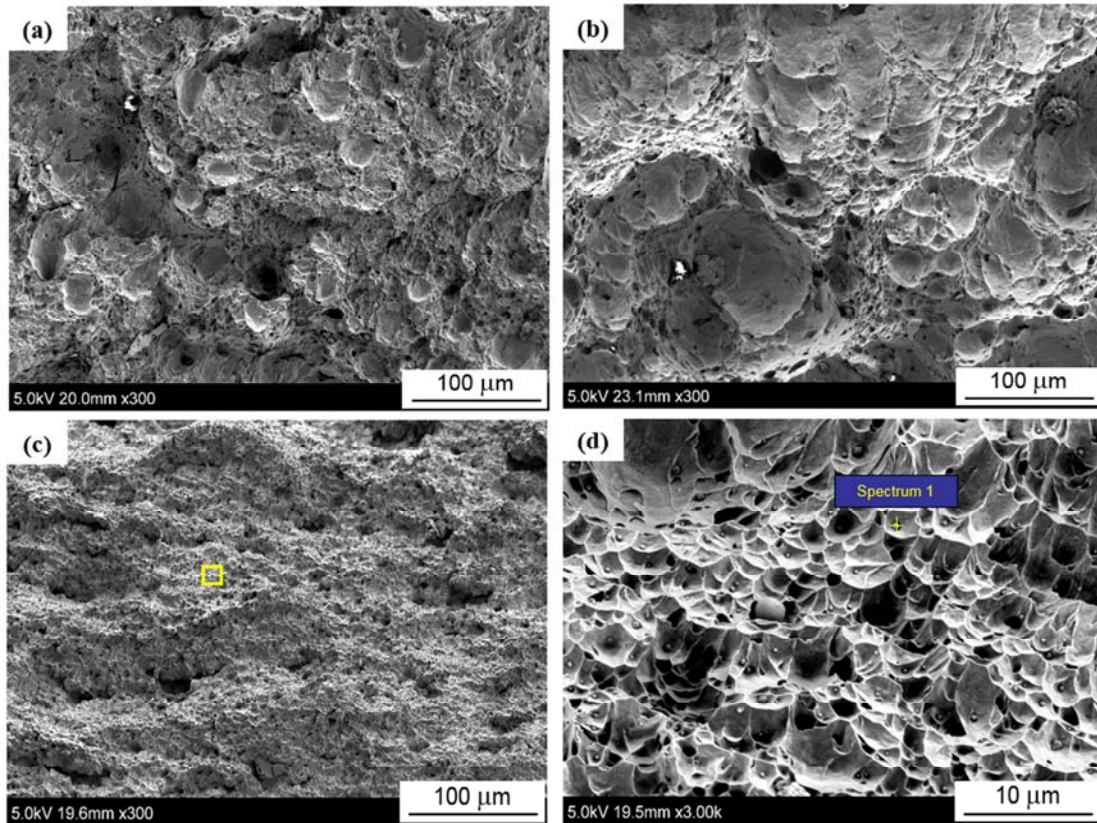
SEM micrographs of impact fractured samples of hybrid weld joints tested at -40°C . (a) base material, (b) hybrid weld with MAG arc, (c) hybrid weld with CO_2 gas arc, and (d) SEM photo of (c) at higher magnification.
